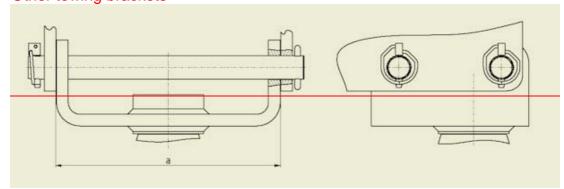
example for pin height adjustable towing bracket with pin adjustable plate
